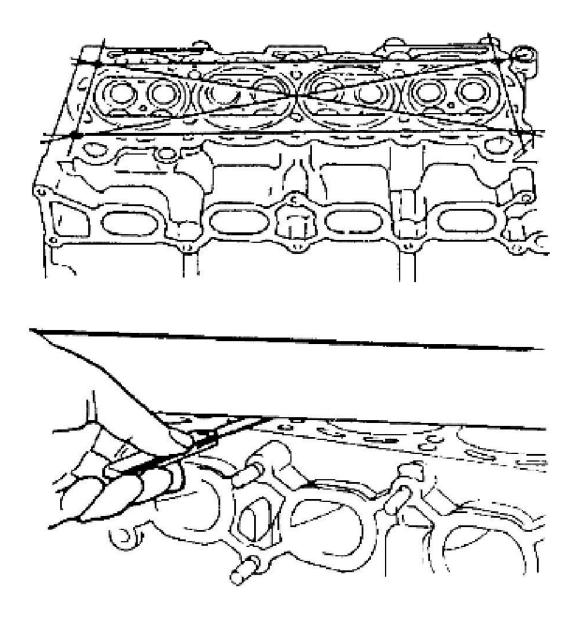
Checking Cylinder Head For Distortion Courtesy of SUZUKI OF AMERICA CORP.
